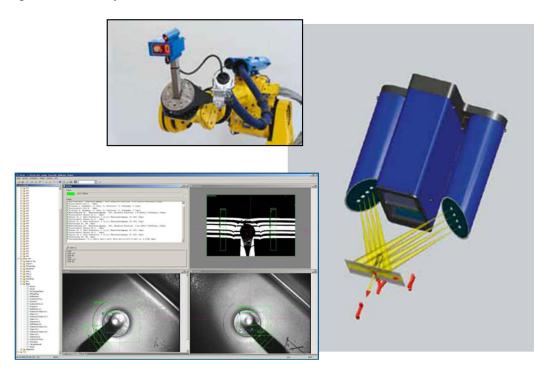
Example for faster metrology by optical capture of position tolerances for bolts during inspection of automotive bodywork with optical sensor on robots.
